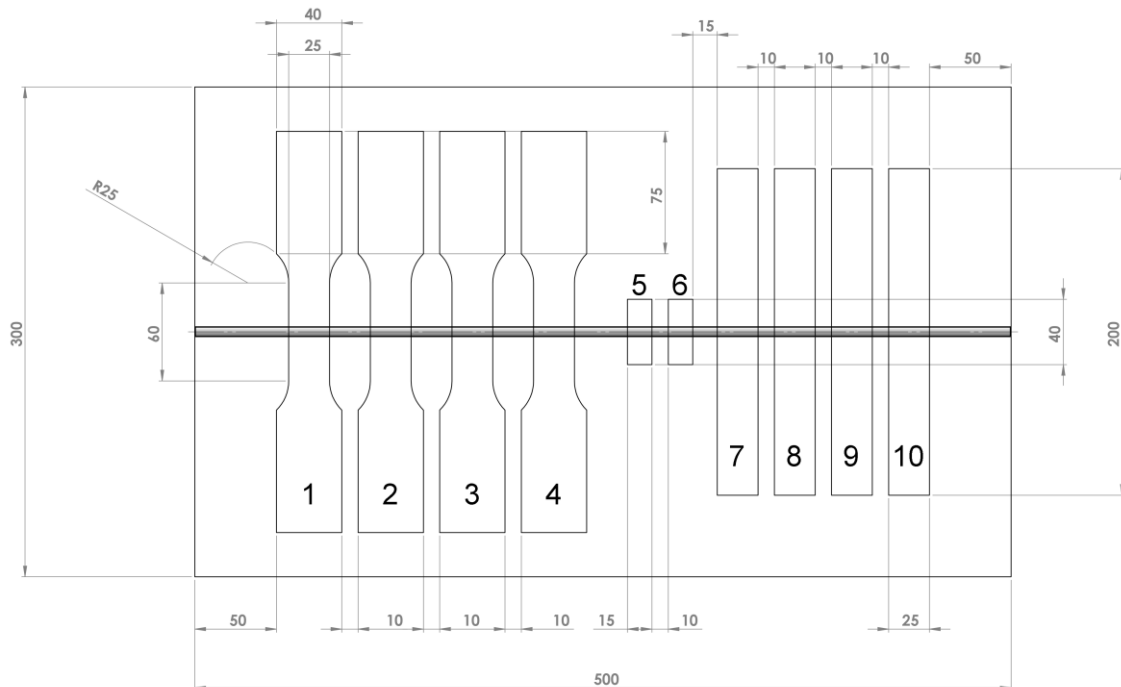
Example of cutting plan for the produced welds; specimen 1-4: hoop tests; 5-6: metallography and hardness; 7-10: pull-out
